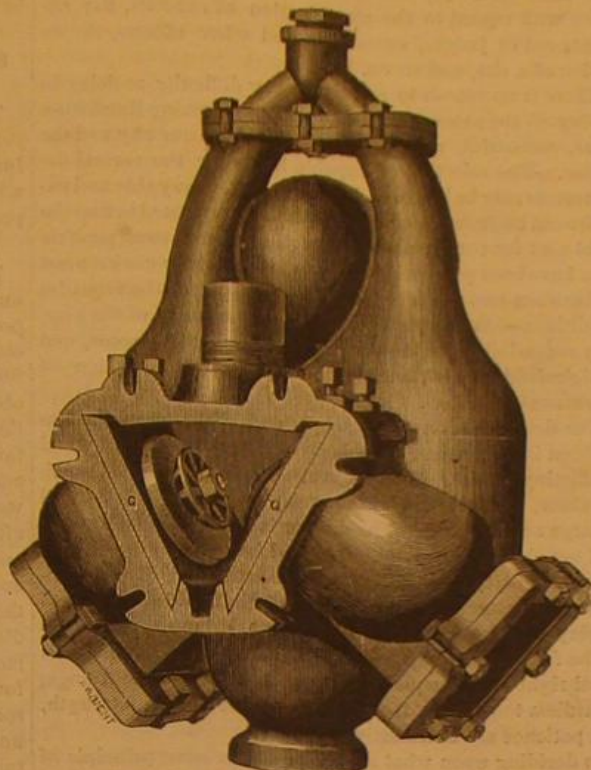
SHOWING DISCHARGE CHAMBER WITH COVER REMOVED.
